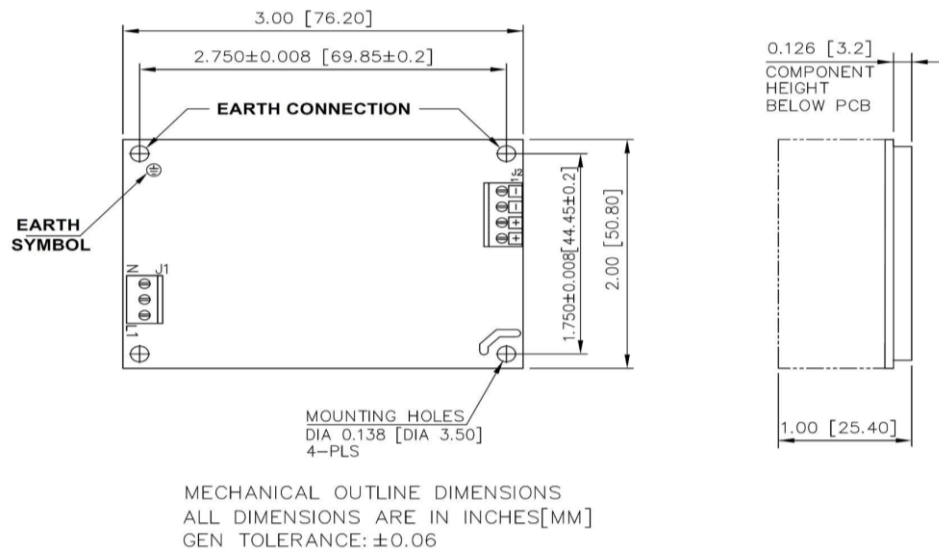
Mechanical Drawing - Screw Terminal (Option 1)
